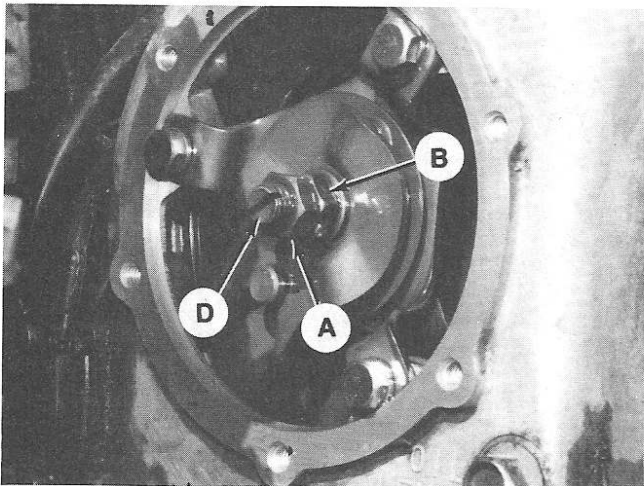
View of clutch release mechanism. Stud (D) should rotate with little effort but have no end play.
